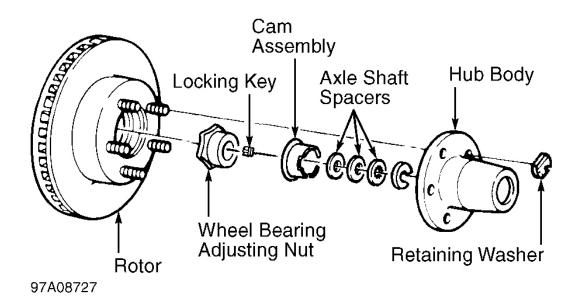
Removing Front Rotor (B2300, B3000 & B4000 With Automatic Locking Hubs) Courtesy of FORD MOTOR CO.
